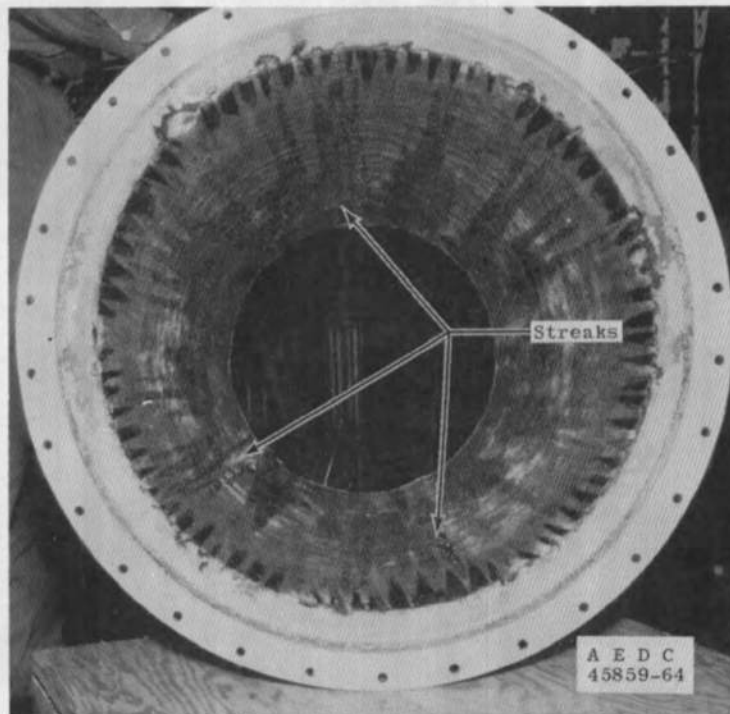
Postfiring View of Combustion Chamber Used during Series A-06, S/N A-1
